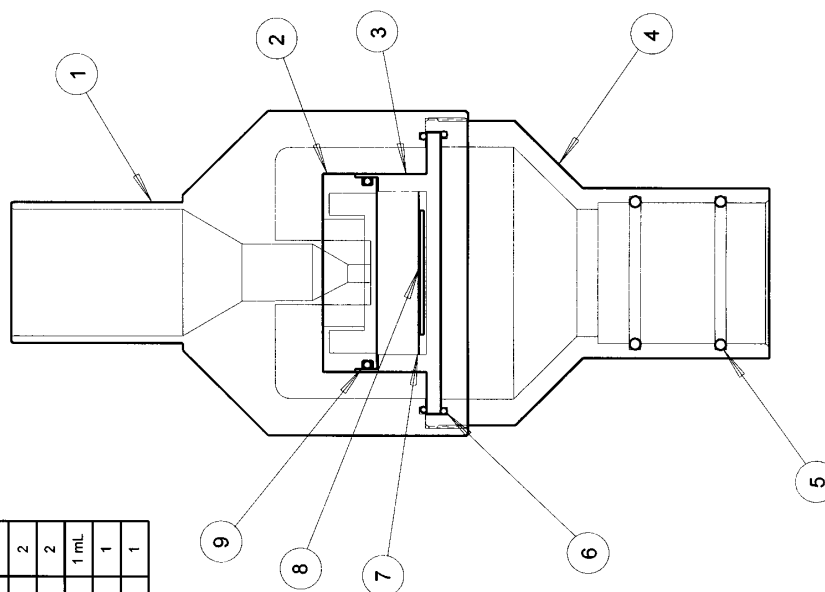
2.5-MICRON IMPACTOR ASSEMBLY
